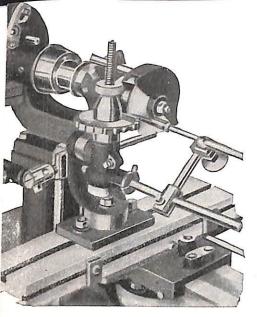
(below).—Grinding slab mill with cup wheel on Jones & Shipman grinder
